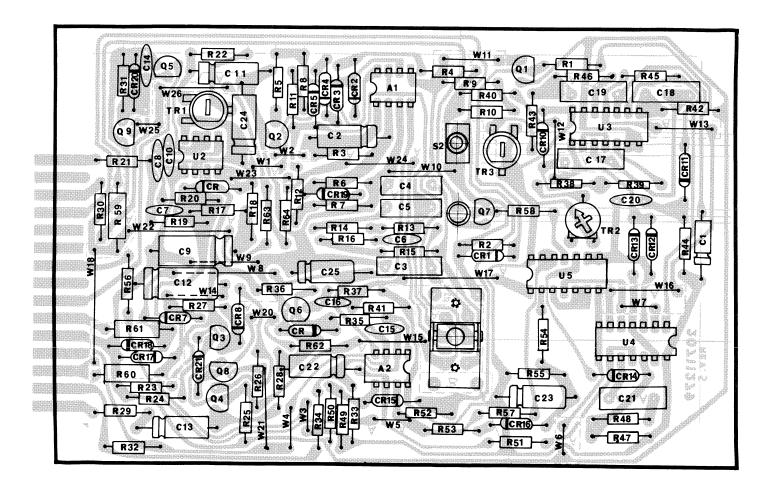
1000Hz and 150Hz Option Board PCB Assembly (840 Models Only)
